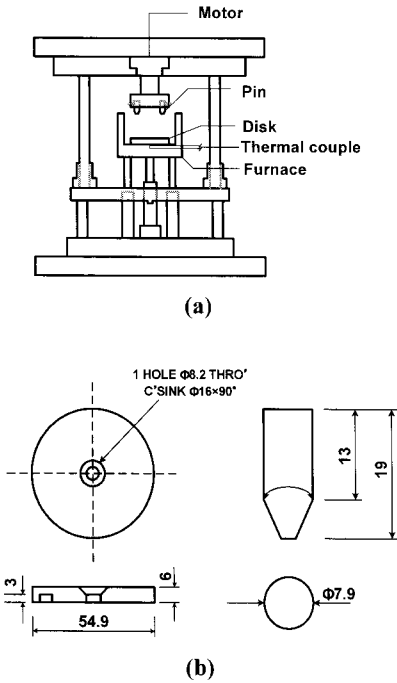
Schematic drawing of Pin-on-Disk test: (a) test system and (b) dimensions of the disk and the pin
